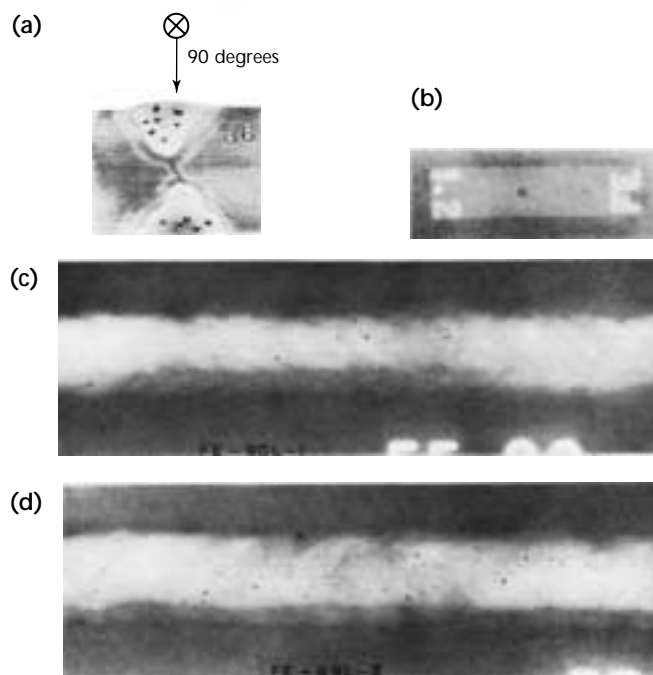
Examples of lack of fusion in steel welds, correlated with weld cross sections: (a) lack of fusion caused by trapped slag in joint of Fig. 15a; (b) slag trapped in sharp notches made by high crown bead in joint of Fig. 15b; (c) severe condition due to poor gun angle and sharp notch in joint of Fig. 15a.<sup>24</sup>
